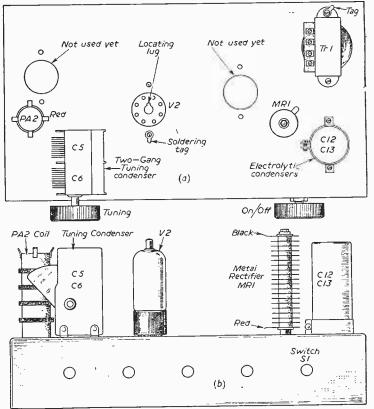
(a) above and (b) below. Top and front views of the receiver showing component positions.
